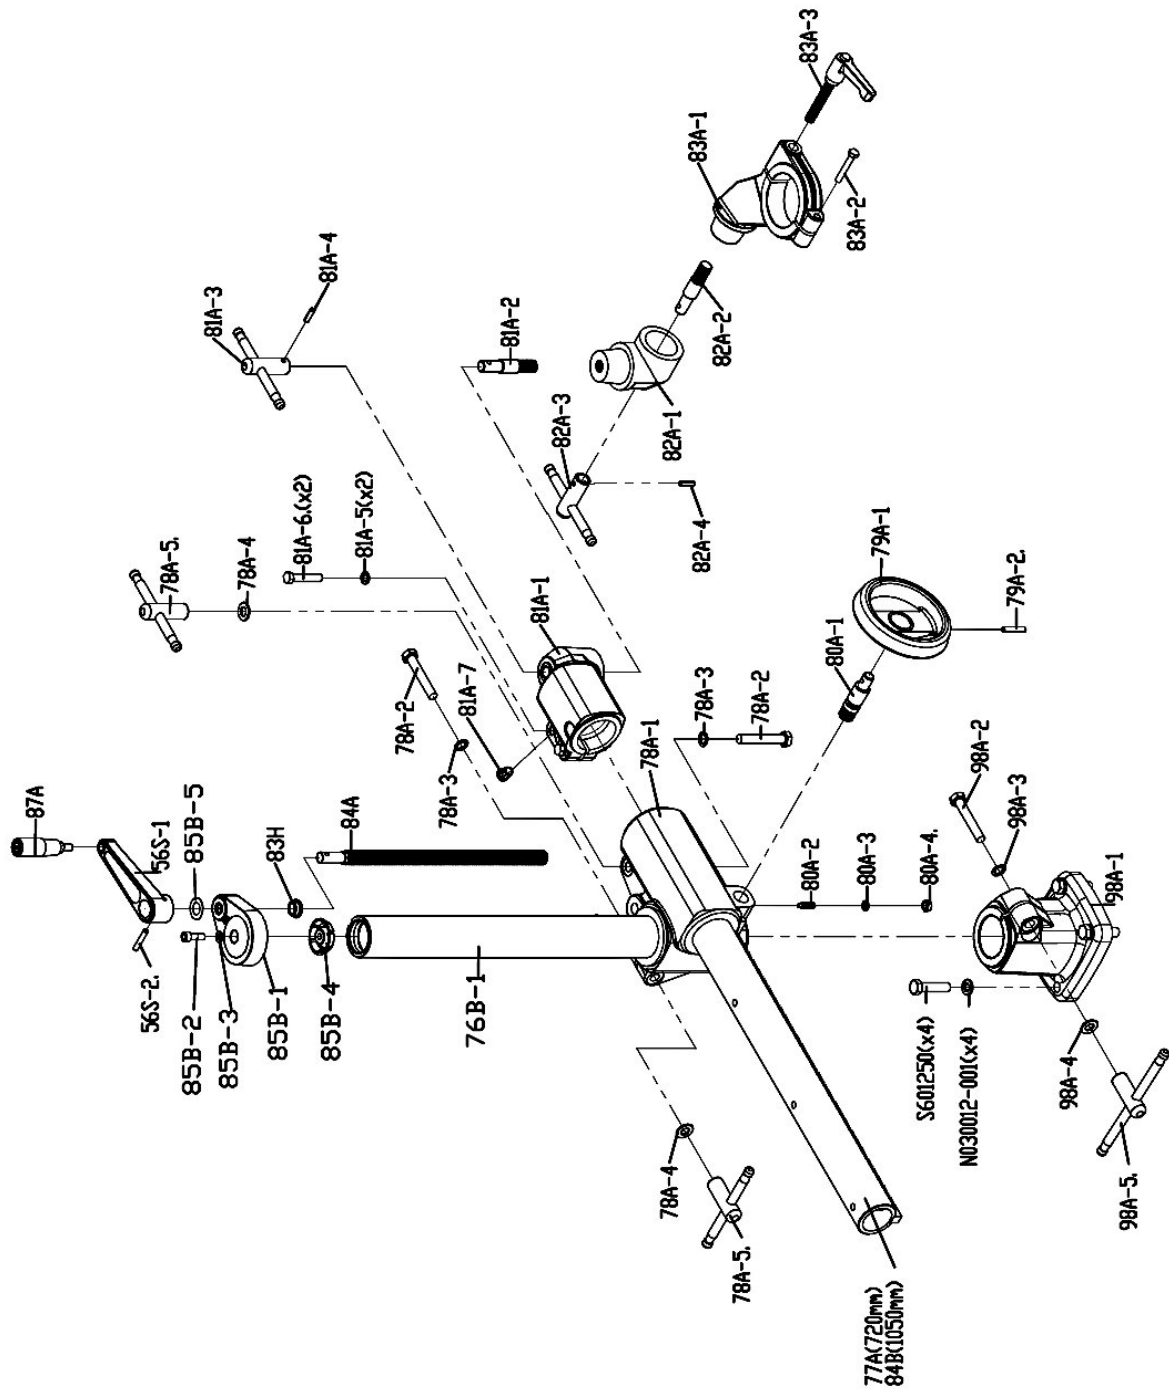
Spare parts drawing 2 - tripod of feed unit VSA 38 EL
